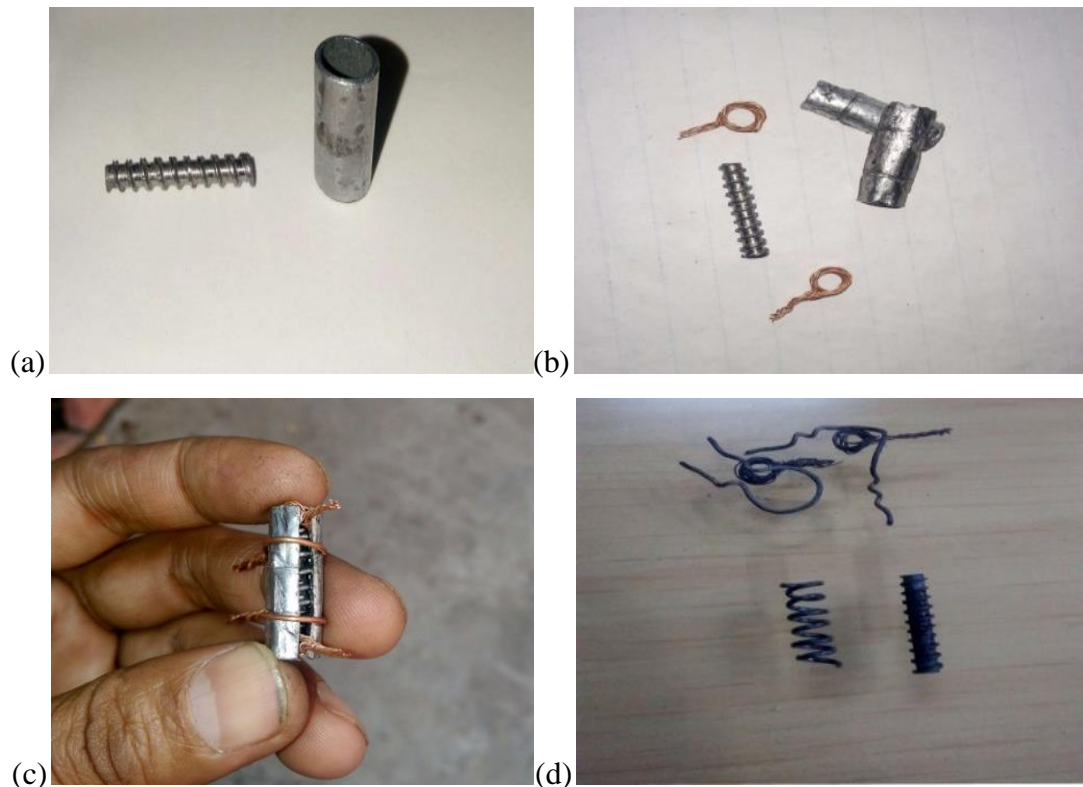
Preparation arrangement of 1.0mm SMA involves (a) threaded screw & MS hollow part, (b) end restraints (Cu) & MS fixture, (c) sample before HT processes, and (d) final SMA spring (1.0mm)
